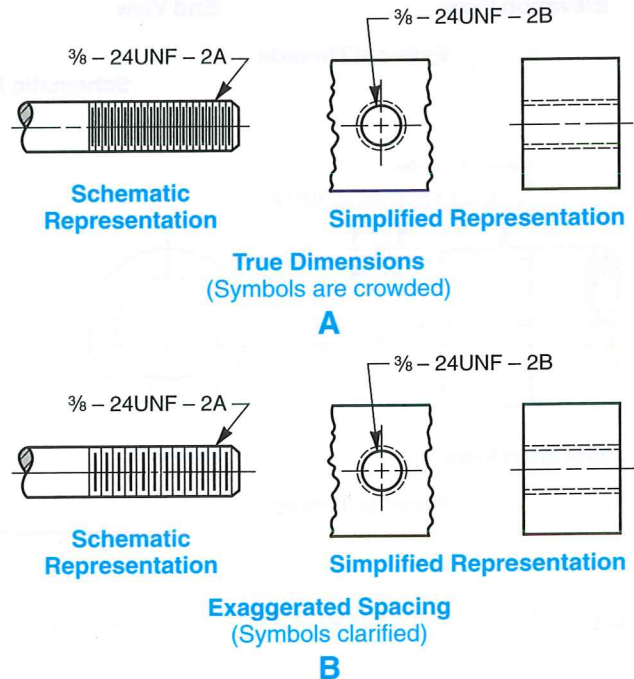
Exaggerated spacing clarifies thread representations on small thread drawings.
